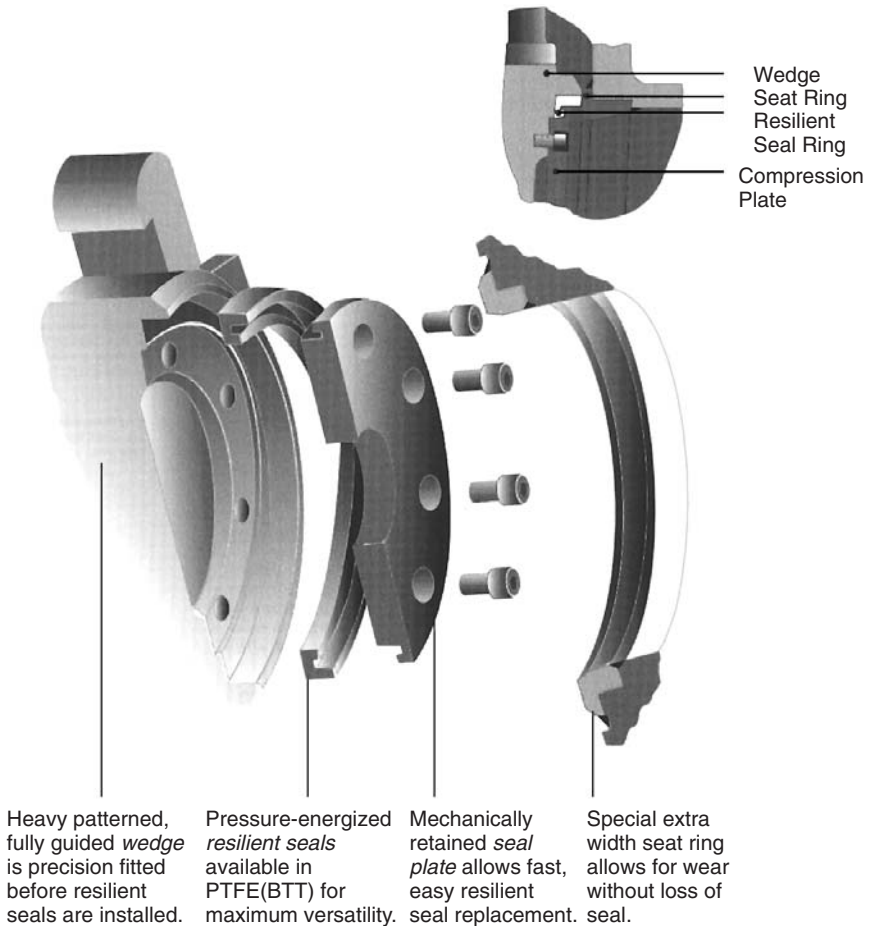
Pressure-energized wedge design (with soft seats). (Courtesy of Pacific Valves, a unit of the Crane Valve Group)
